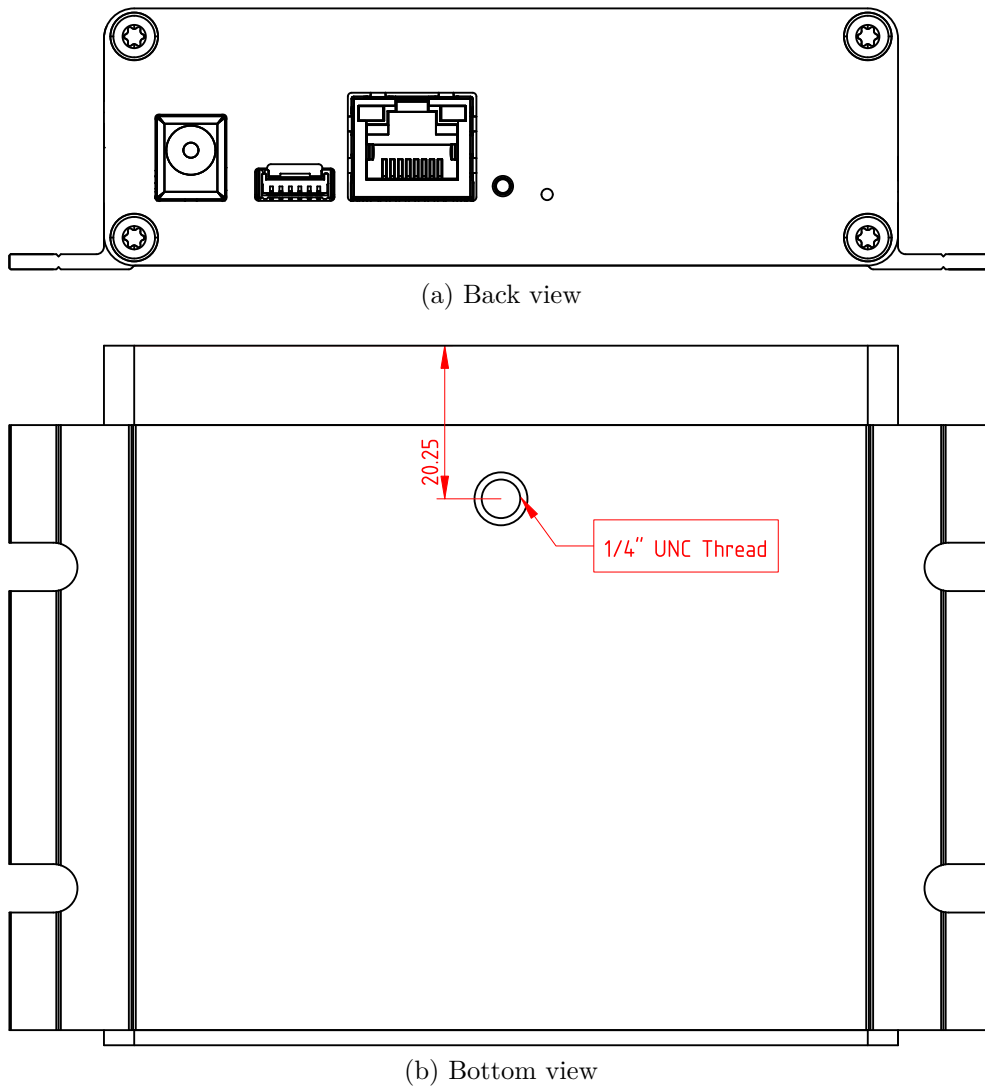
(a) Back and (b) bottom view of Ruby with dimensions in millimeters.
